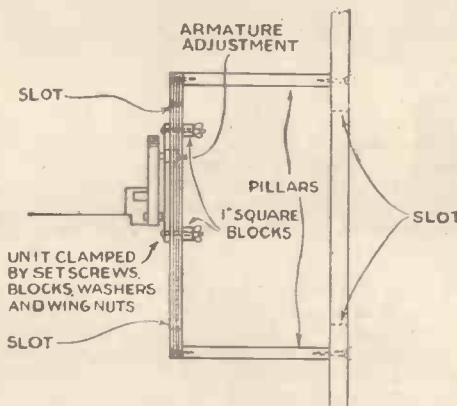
Side view of adjustable chassis, showing how unit is fixed in position
